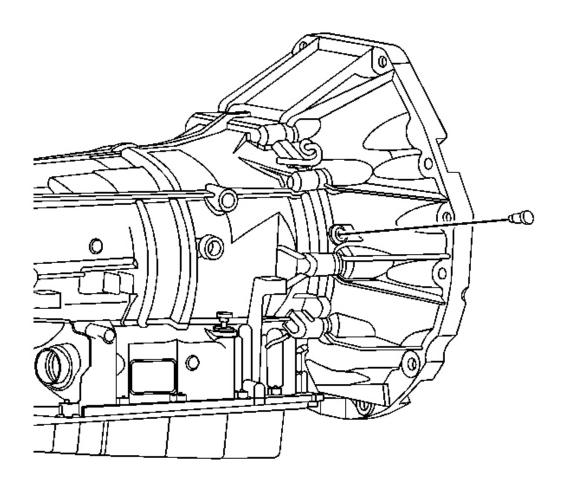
View Of Oil Pressure Test Plug Courtesy of GENERAL MOTORS CORP.
